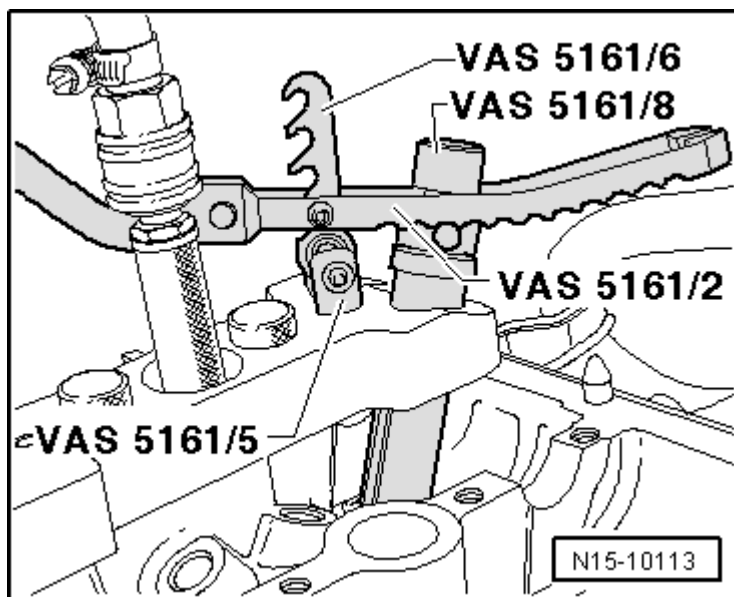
Identifying Pressure Forks VAS 5161/2 Engaged
